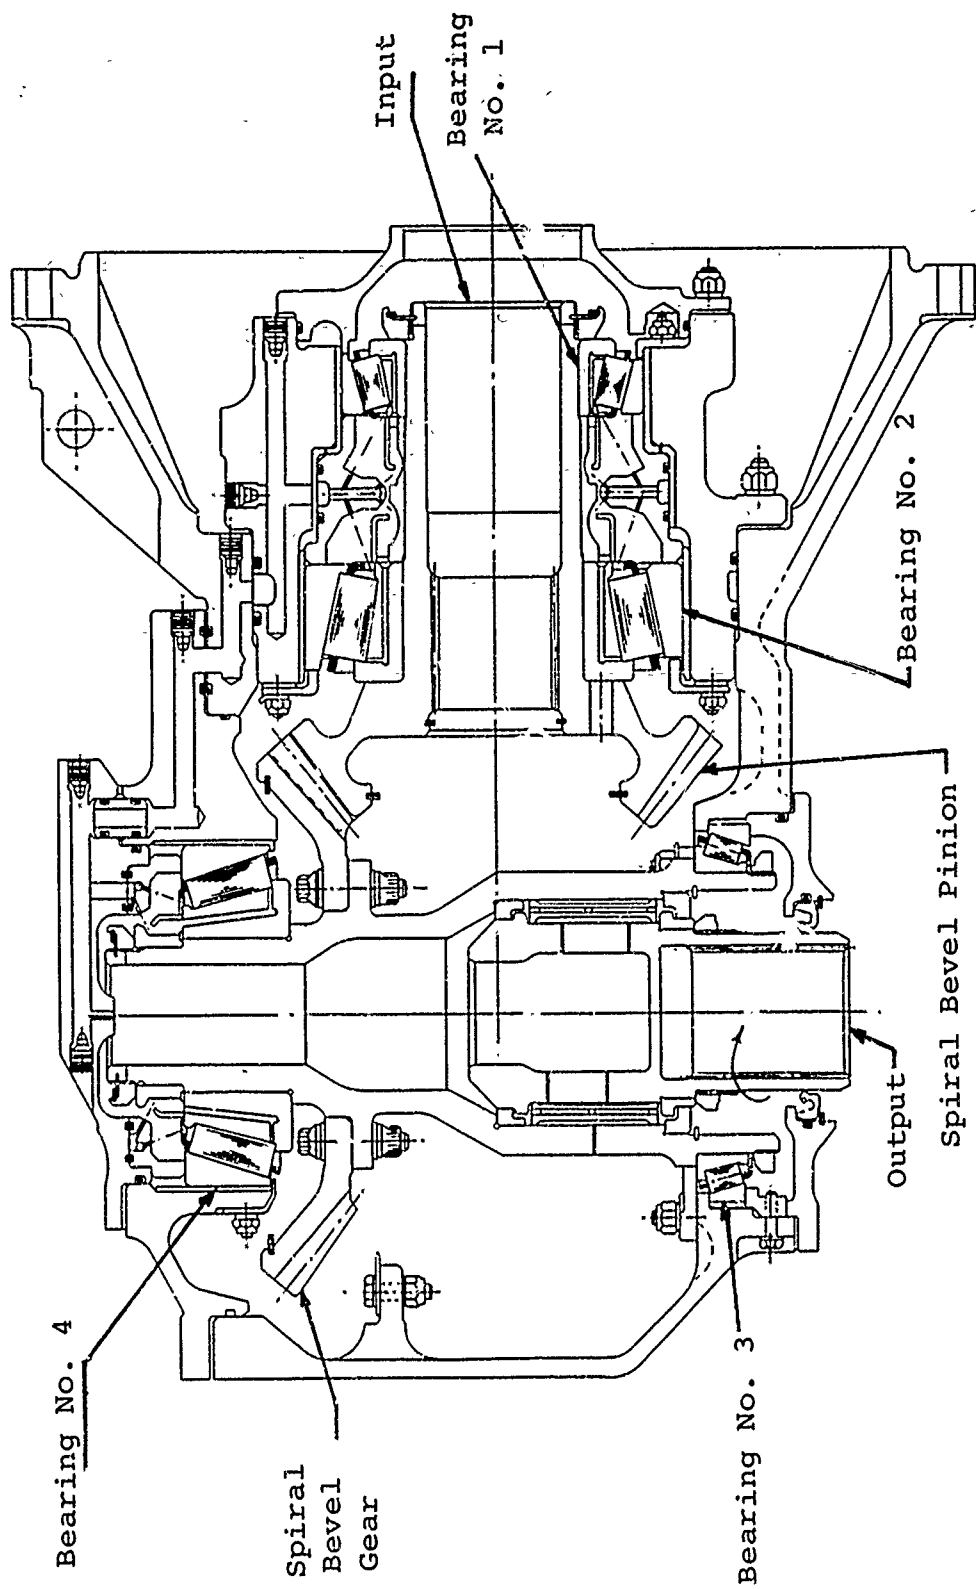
Modified Turboshaft Engine Transmission Tapered Roller Design.
